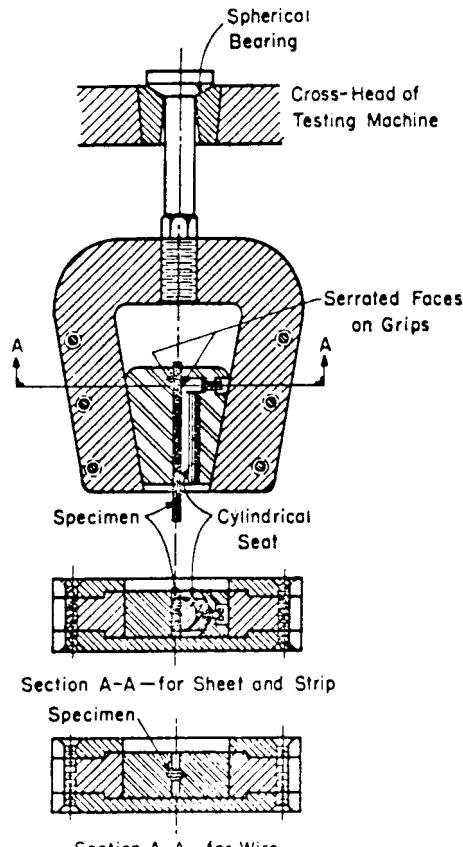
Gripping Devices for Sheet and Wire Specimens
